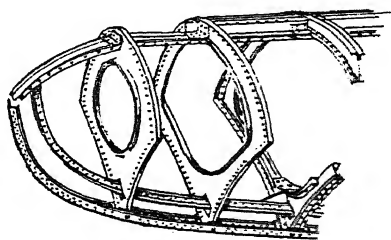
STAINLESS STEEL FLOAT, SHOT WELDED
